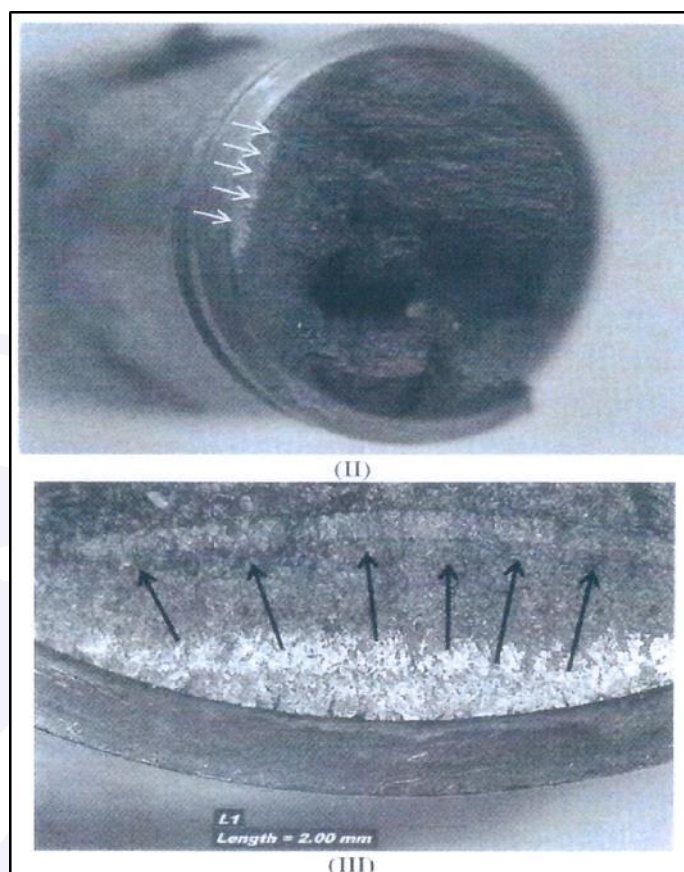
Image detailing the fracture of the end of through-bolt B. In detail (II), under stereoscopy, the arrows indicate beach marks characteristic of material fatigue fracture. In detail (III), the fracture surface is magnified.
